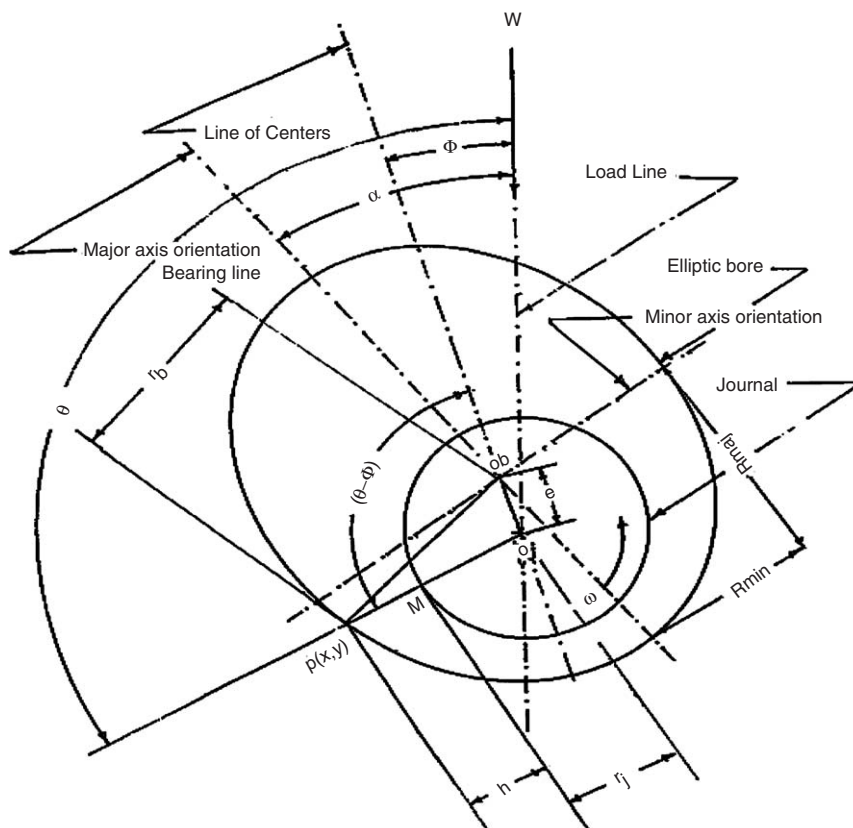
Elliptic Bore Journal Bearing Schematic.
